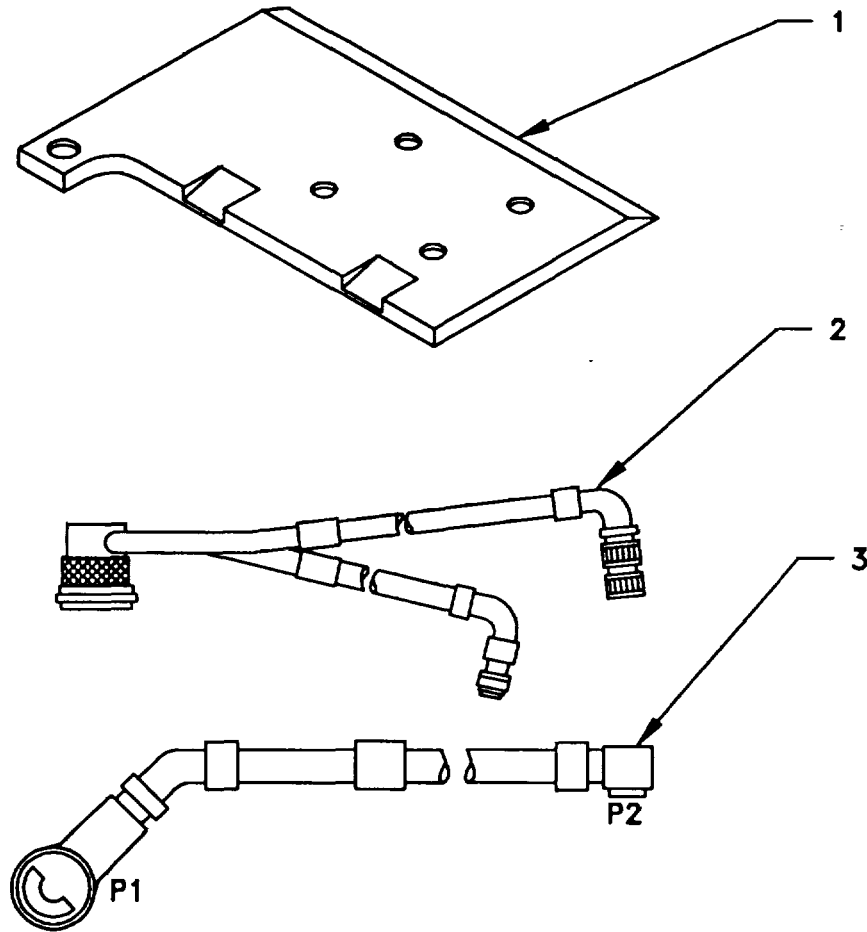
TSEC/KY-57 Illustrated Parts List
